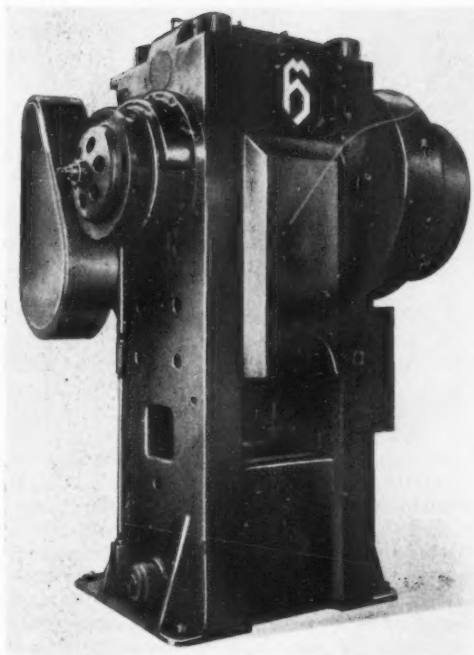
Hasenclever 250-ton, High-speed, Eccentric-drive Forging Press
